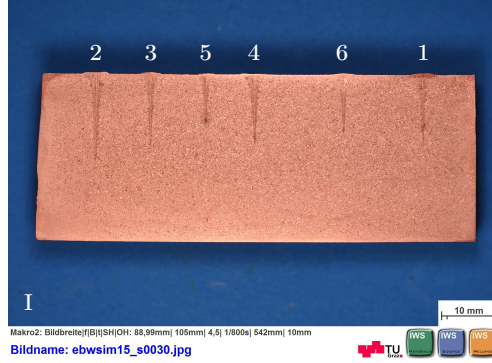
Section cut of bead on plate welds of a Cu-DHP specimen of 30 mm thickness welded with parameters from Table 3.2
